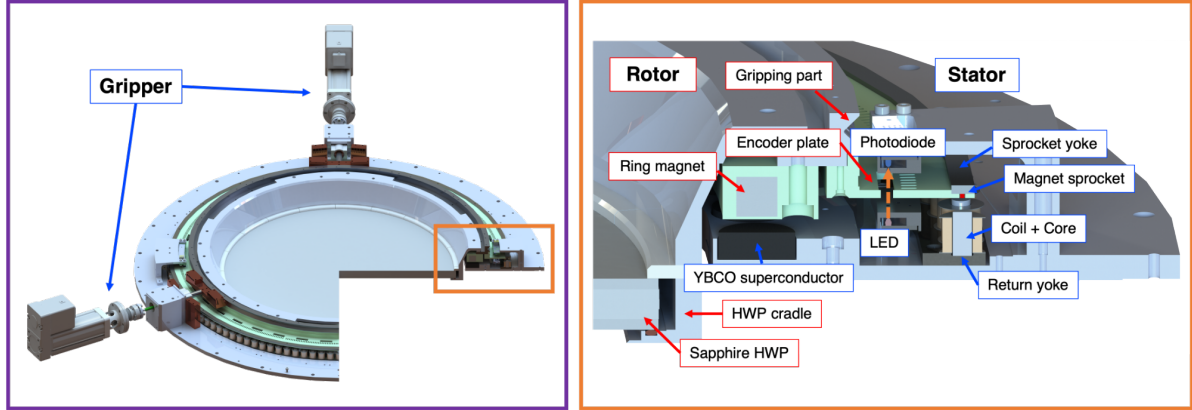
Left panel: the CAD views of SO CHWP system. Right panel: the magnified cross-sectional view of the rotation mechanism. Rotating components are labeled in red, and stationary components are labeled in blue.
